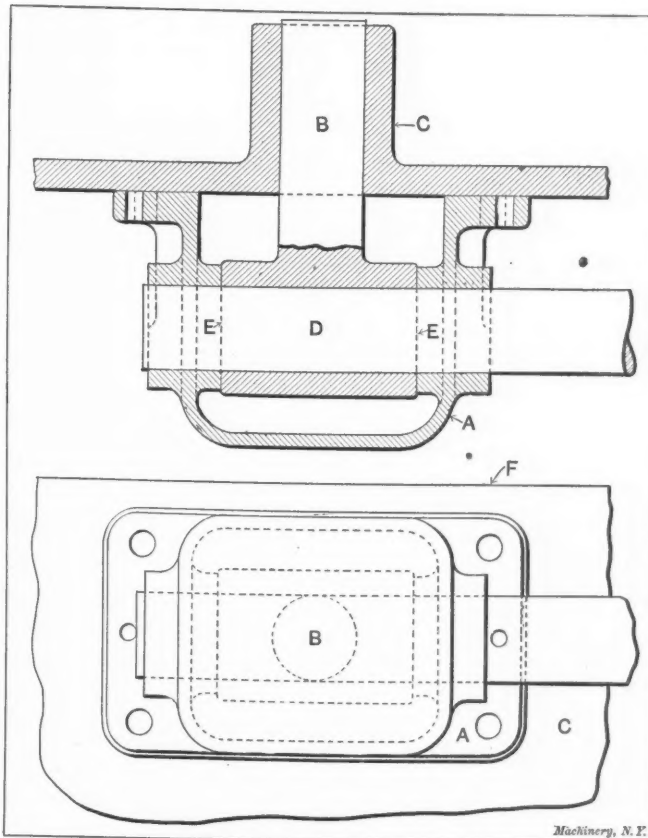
T-jig for Locating a Bevel Gear Bracket
